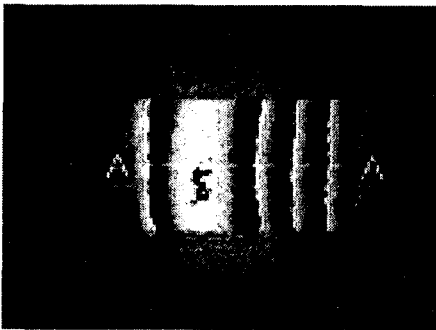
Wrapped phase image of spot welded cantilever
